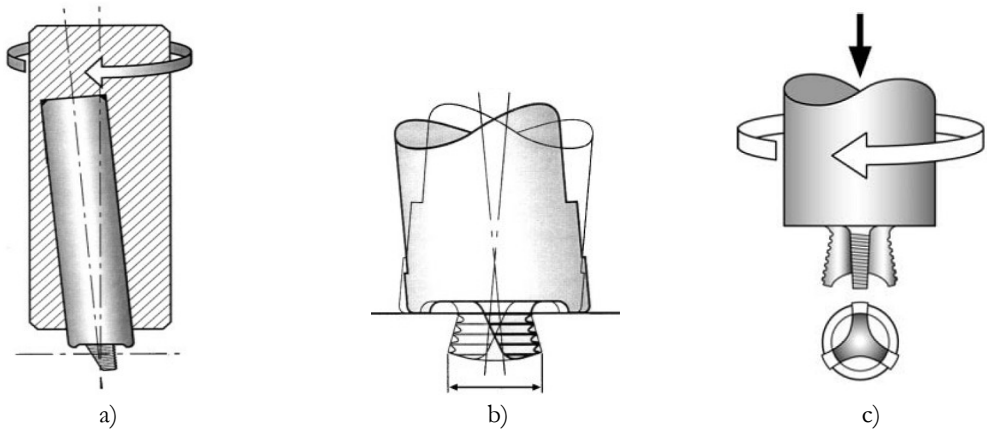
Friction stir lap welding tools developed by TWI. a) Skew-stir tool b) Swept region by Skew-stir tool c) Flared-Triflute tools [10, 11].
